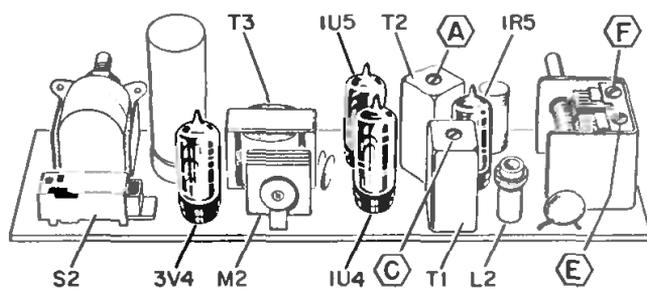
Top View of Chassis 4W2. Tube Locations and Alignment Points Shown.
